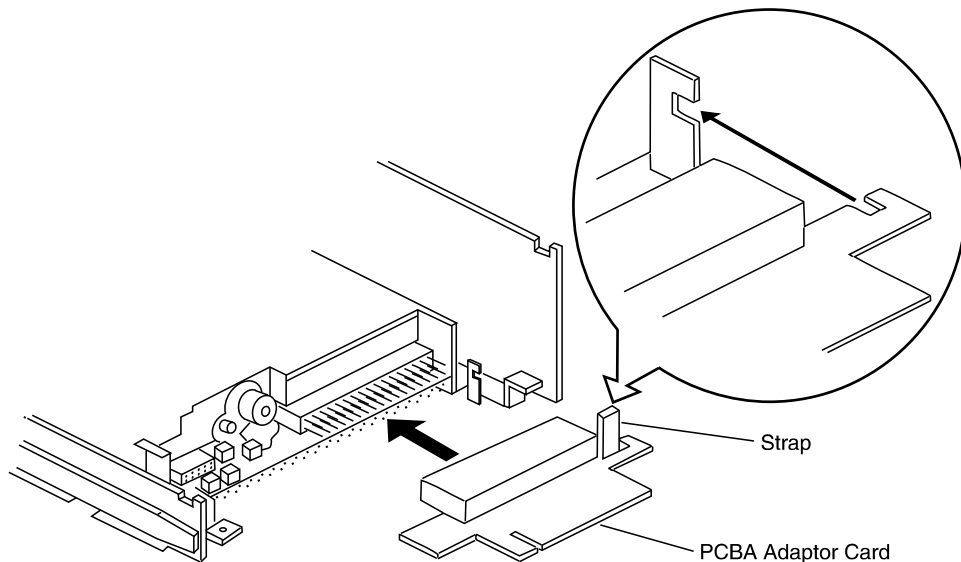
Floppy Disk Drive Unit PCBA 5 Inch Adapter Card
